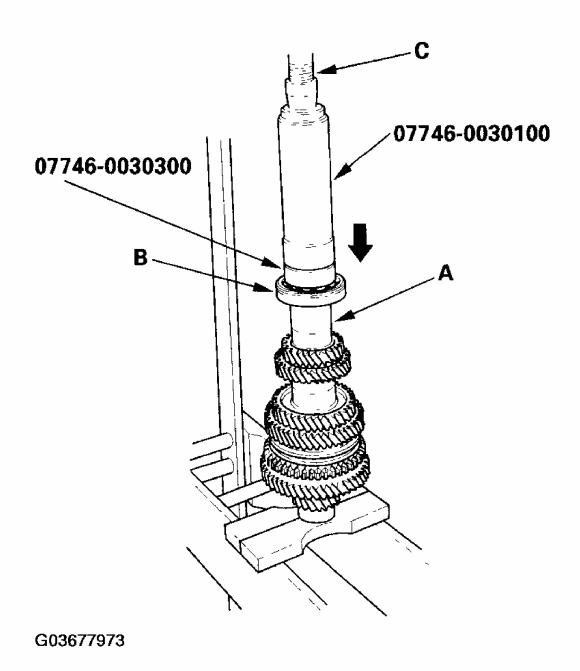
Installing Distance Collar, 35mm Shim, And New Ball Bearing Courtesy of AMERICAN HONDA MOTOR CO., INC.
